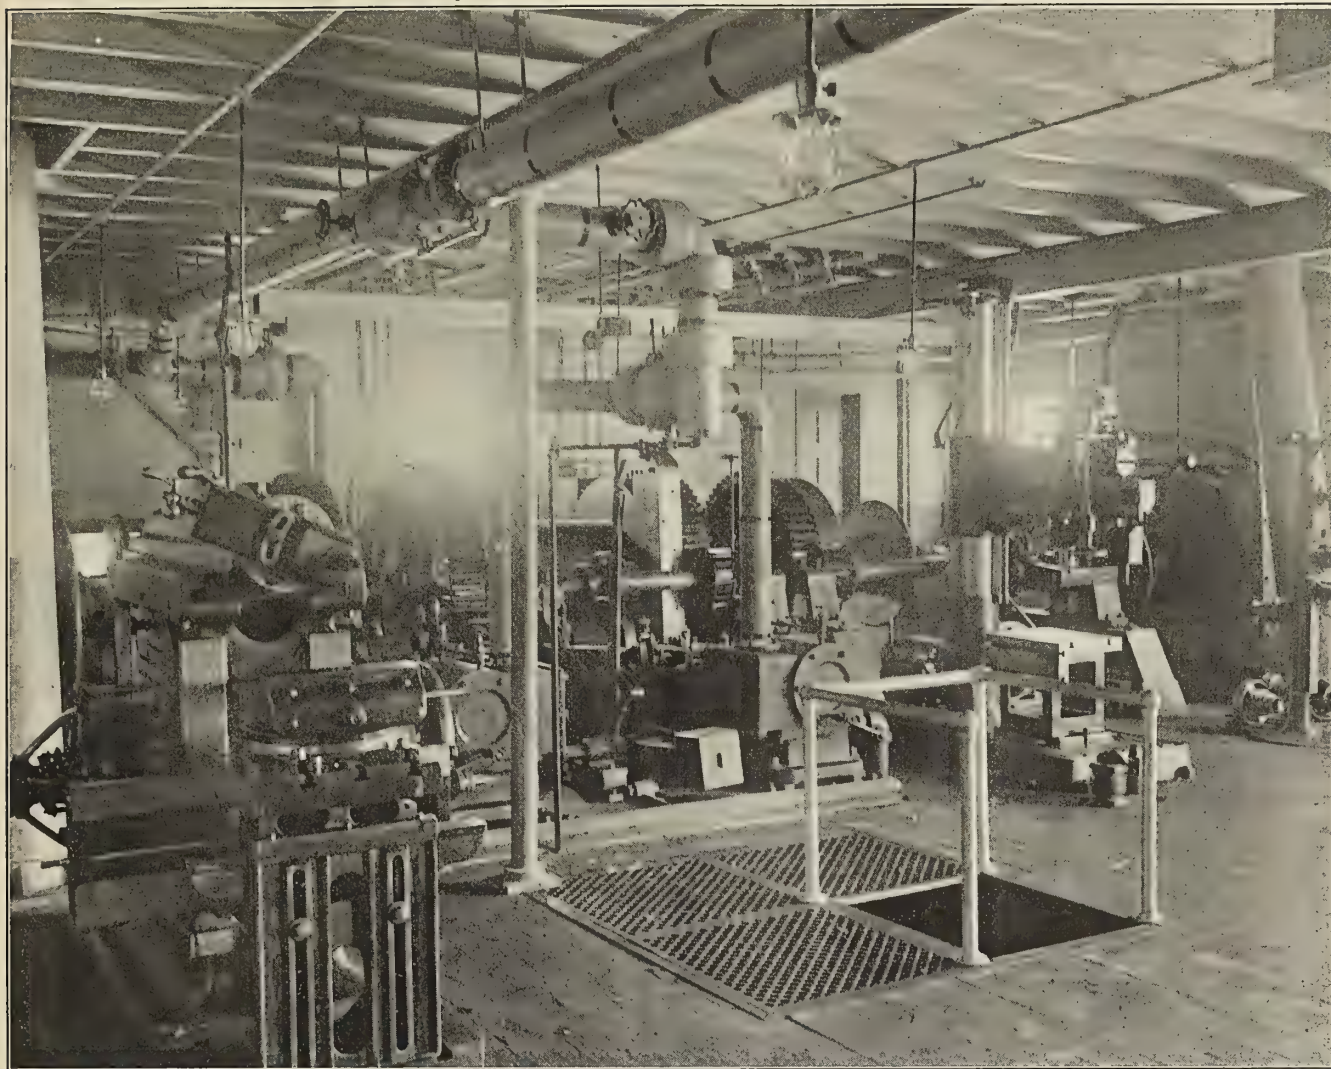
Forward Part of Engine Room, Showing Some of the Machine Tools and also the Engines for Swinging the Dredge and Raising and Lowering the Cutter
